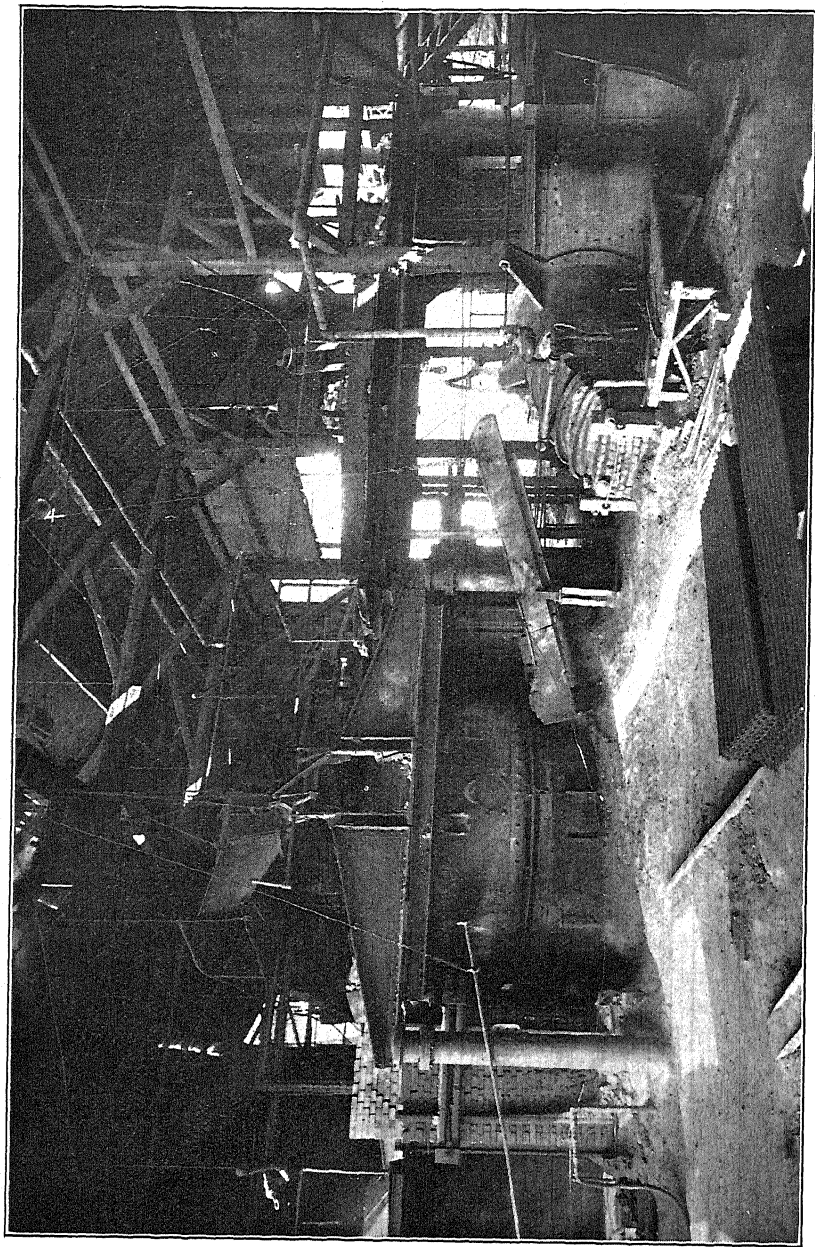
FRONT VIEW OF WASHING FURNACE, SHOWING TIPPING RECEIVER FOR HOLDING WASHED METAL WHILE CASTING IN MACHINE ON THE RIGHT.
